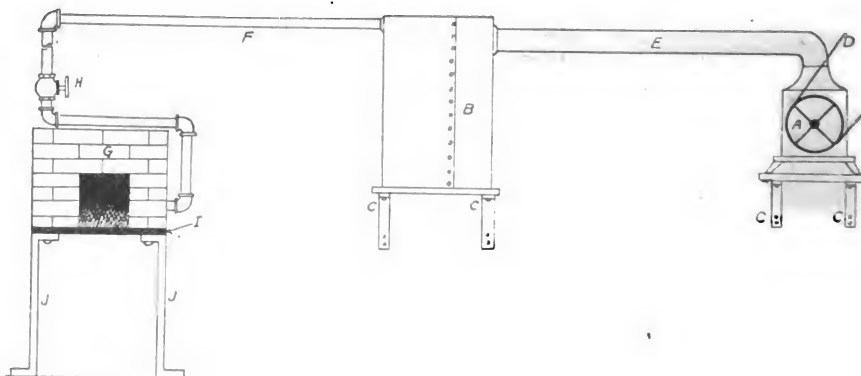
THE BLOWER, TANK AND FURNACE OUTFIT FOR BRAZING
